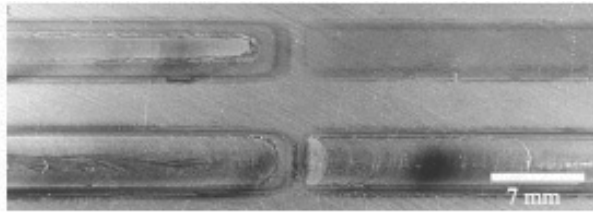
Face view after laser cladding, 32CrMoV12-28 steel, laser power of 1.2-2.3 kW
